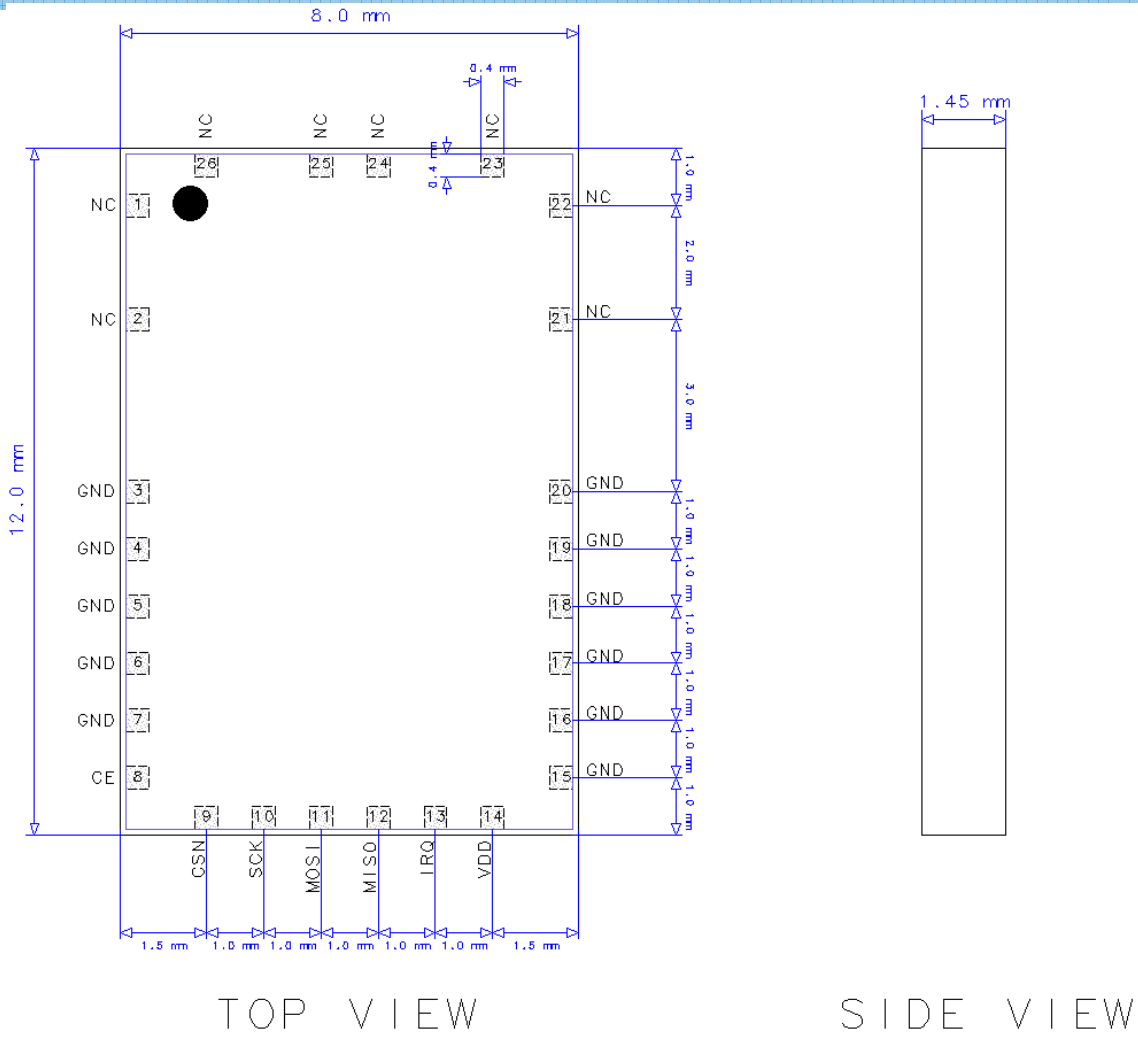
Dimensional drawing for a 8 x 12 x 1.45 mm, 26-Pad Package
